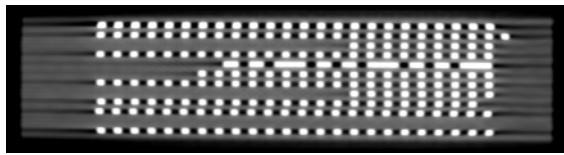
Planar transformer PCB windings cut view is in the  $zy$  plane, in the middle of the bottom horizontal section of Fig. 13, obtained by a micro computed tomography (CT) scanner [30]. Only 11 out of 12 layers are visible, since the connection layer (conn in Fig. 12) is not present where the cut view was made.
